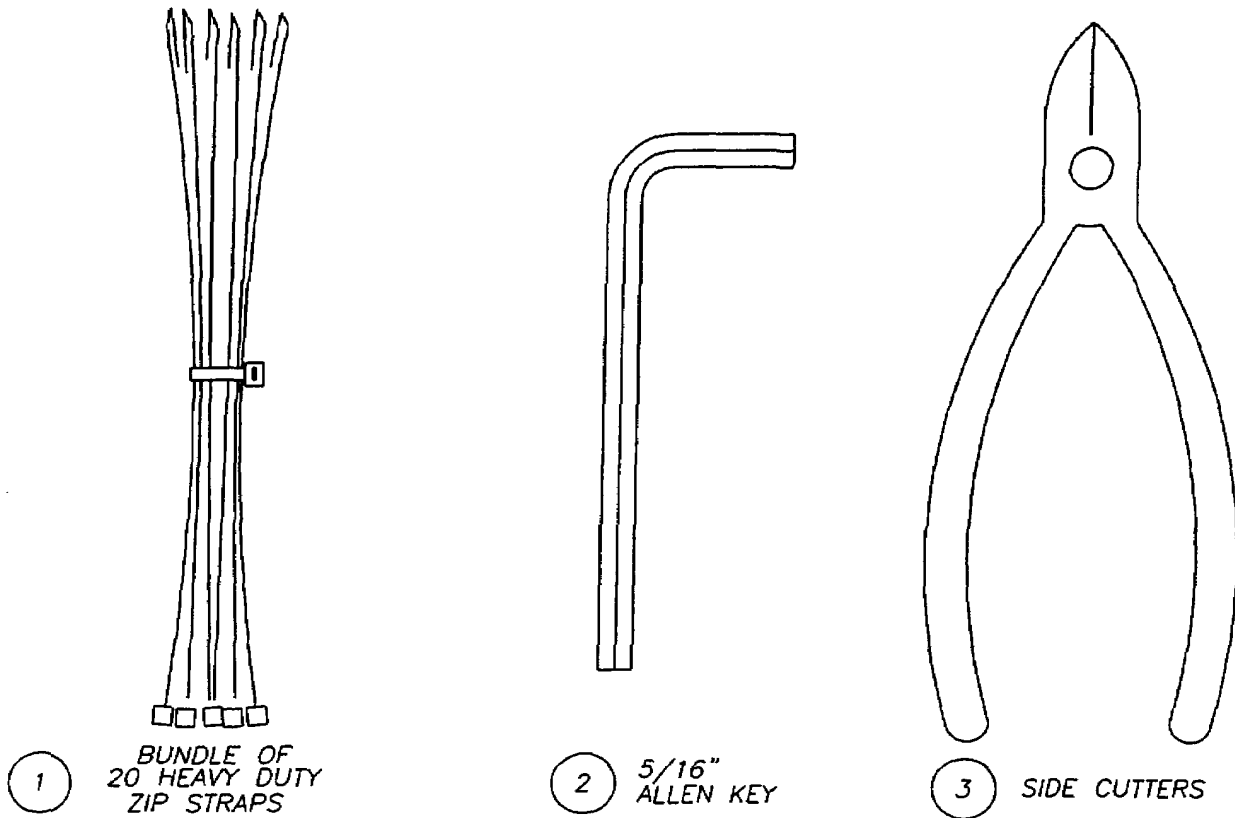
POWER FILL II RECOMMENDED CARRY-ON TOOL KIT
